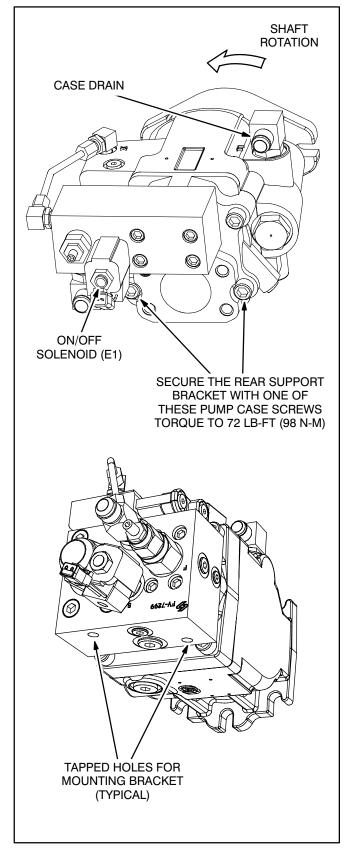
TYPICAL PUMP ASSEMBLIES
